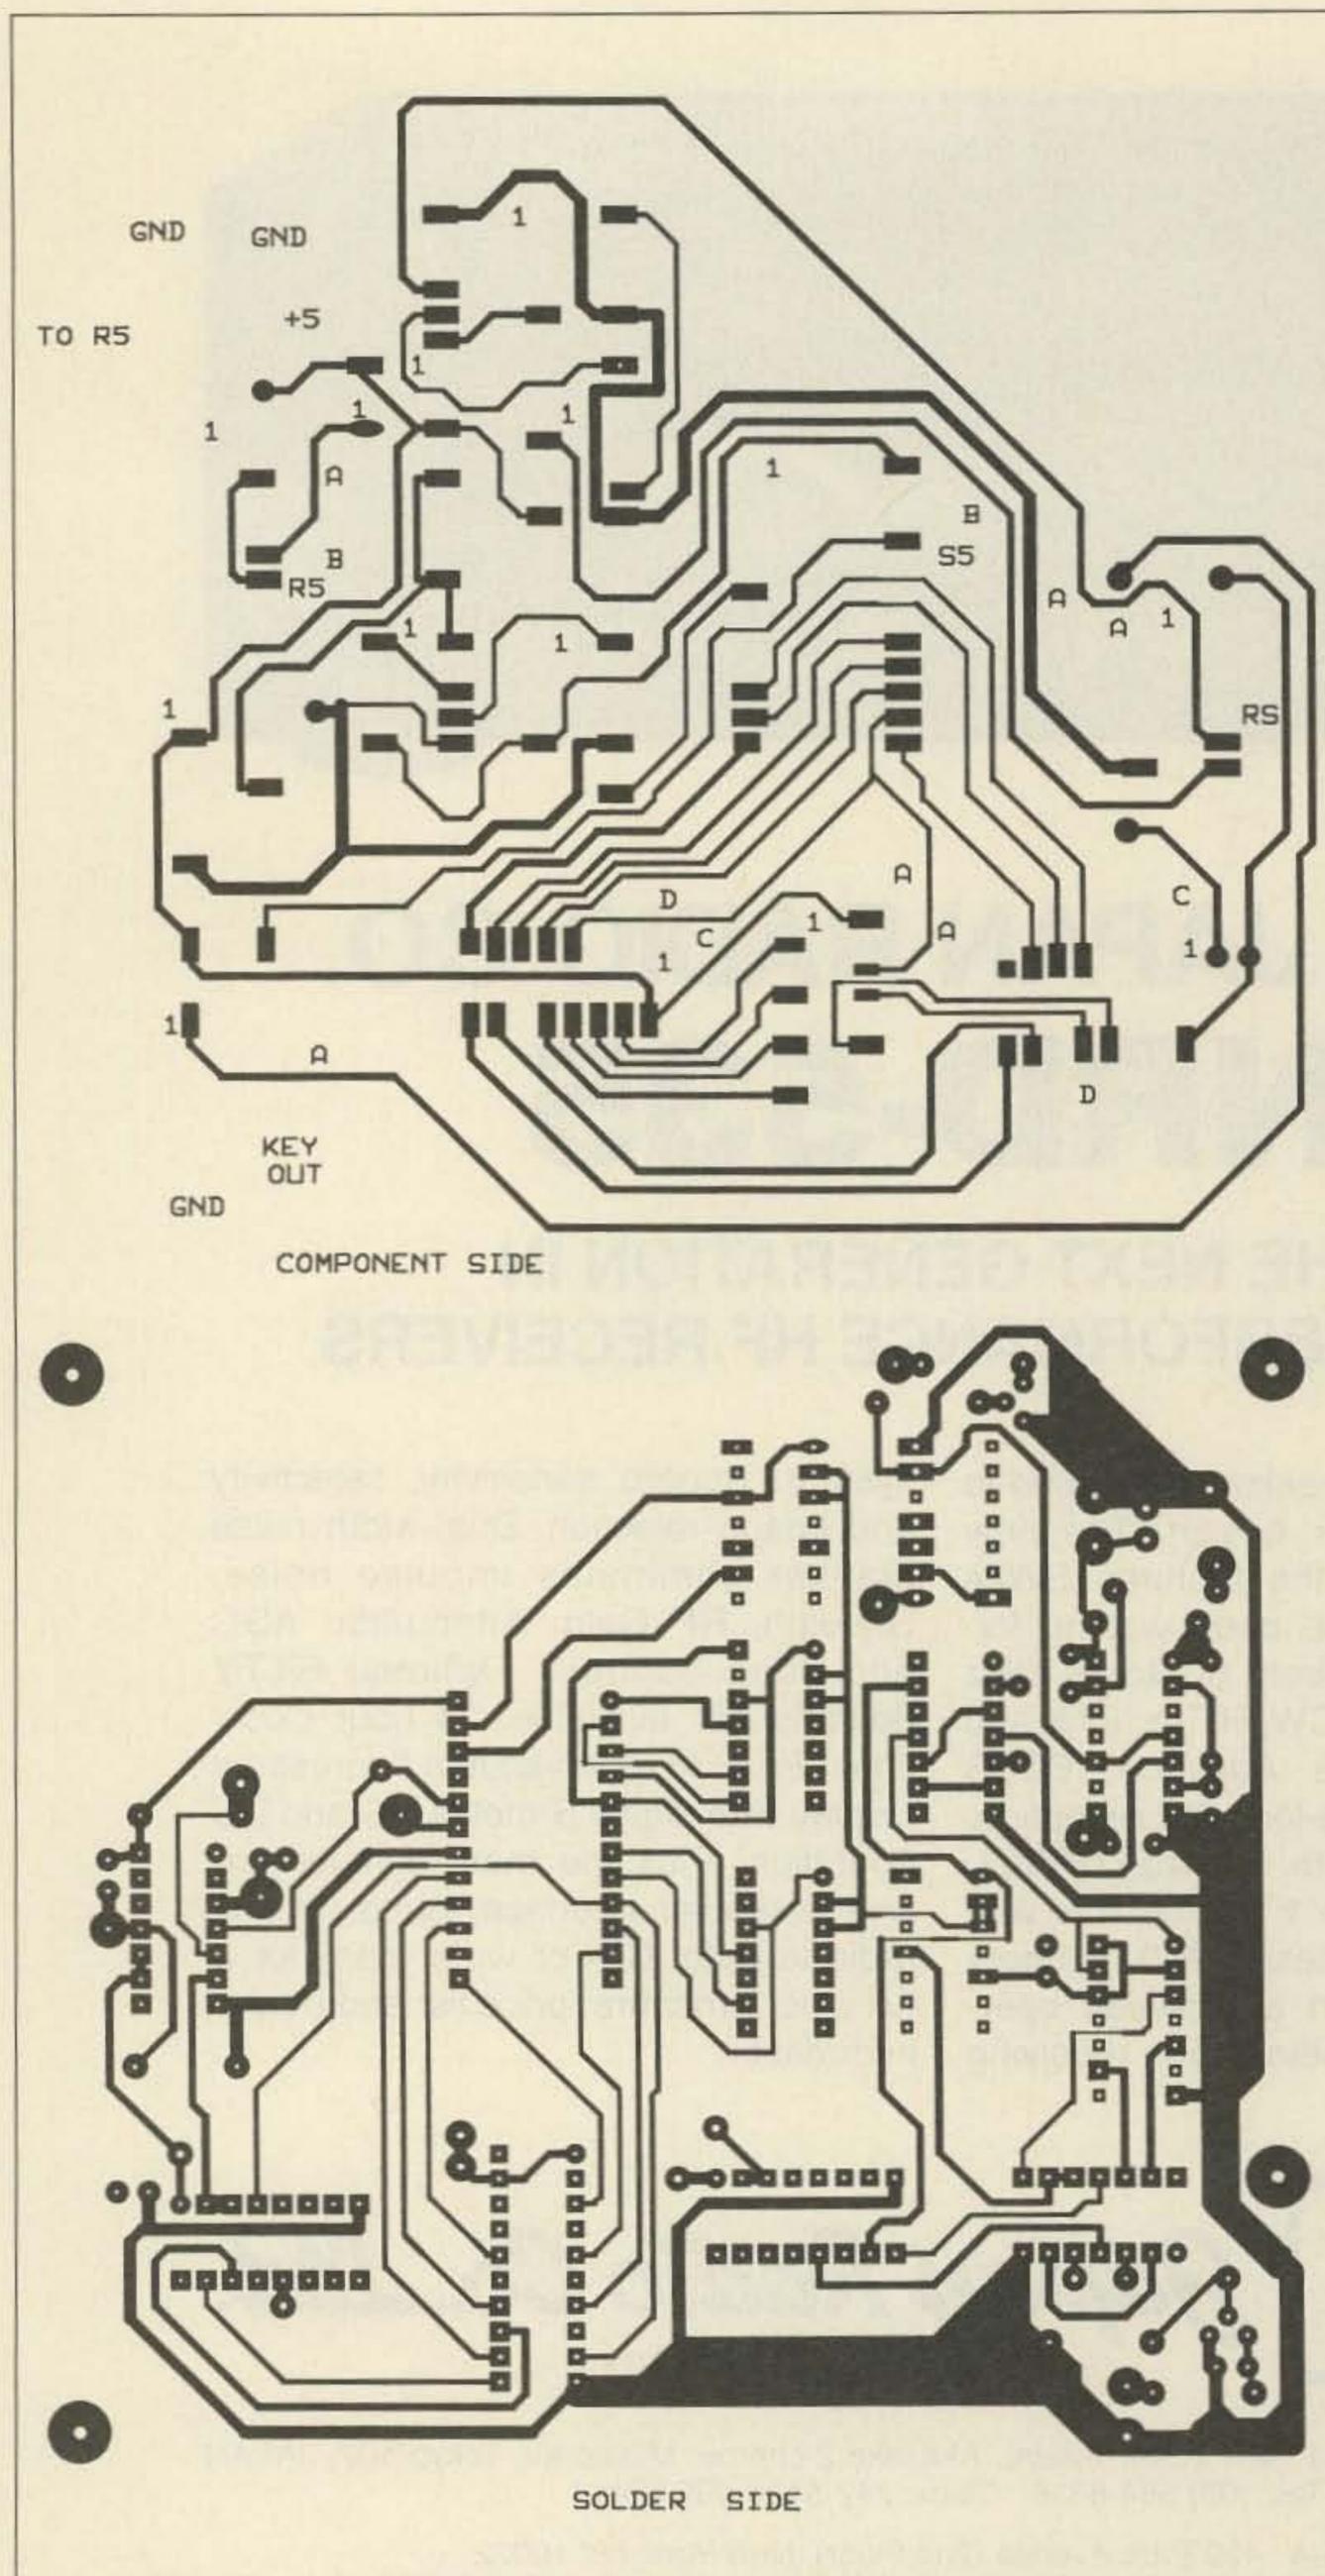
PC board foil patterns. Top layer (a) and bottom layer (b). Note: All pads on top layer must be soldered. Letters 'A' through 'D' indicate jumper locations.
